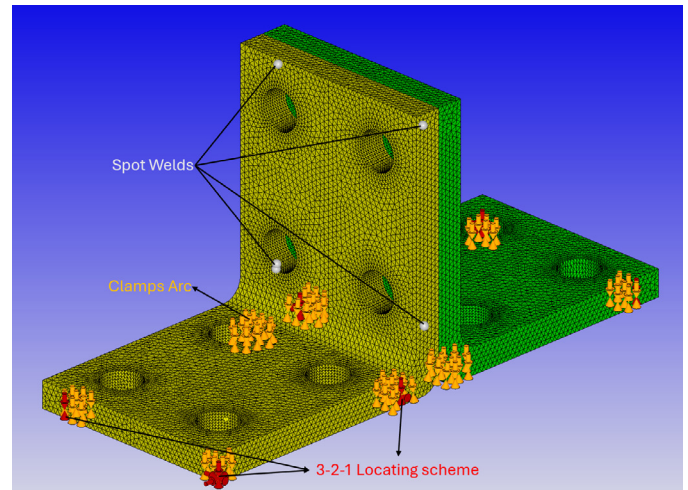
Assembly of brackets with four Spot Welds
